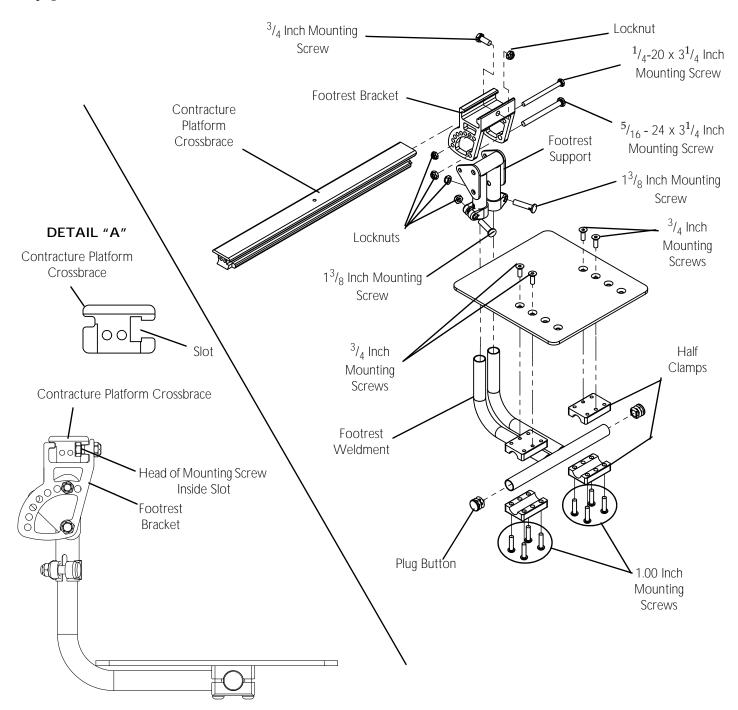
Assembly/Disassembly of the Contracture Footrest Platform
